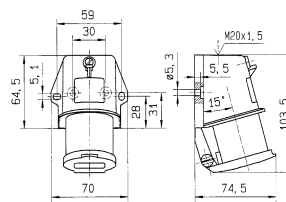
MB 203 Dim. in mm	Amp. Poles	16		32
